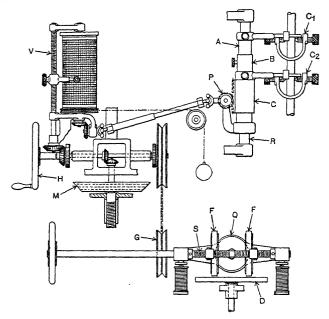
Riehle Autographic Recording Gear (Machinery)
